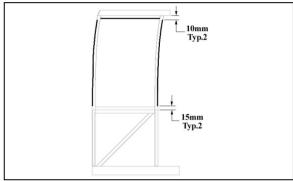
SIDE FIXED WINDOW - 1/4 X 1/2 DOUBLE FACE ADHESIVE TAPE INSTALLATION
